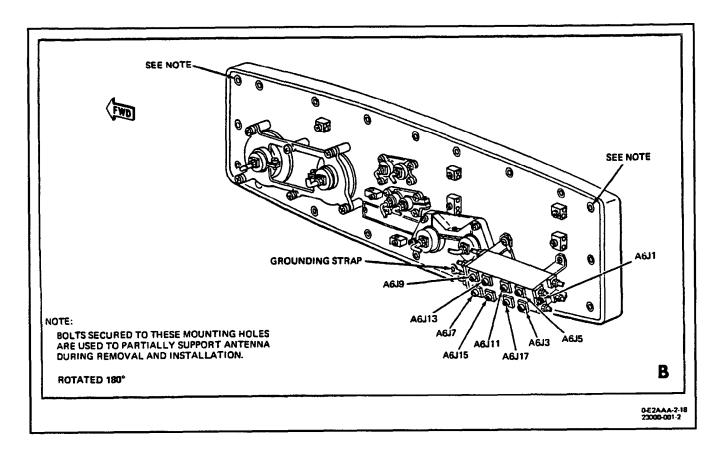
Removal and Installation of Antenna Assembly AS-2883/ALR-59 (Sheet 2)
